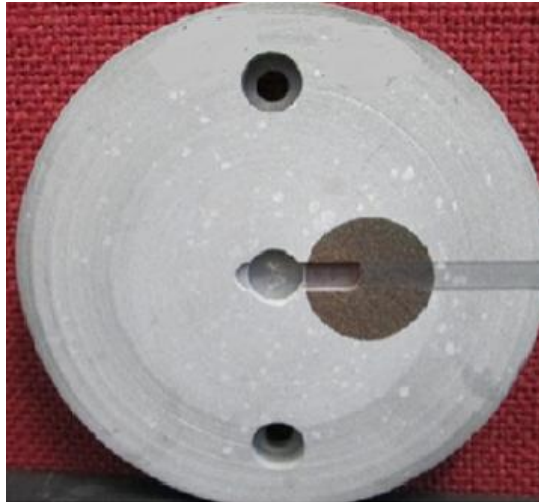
The machined bottom face of a solidified aluminium filled epoxy with the casting pattern implanted.
